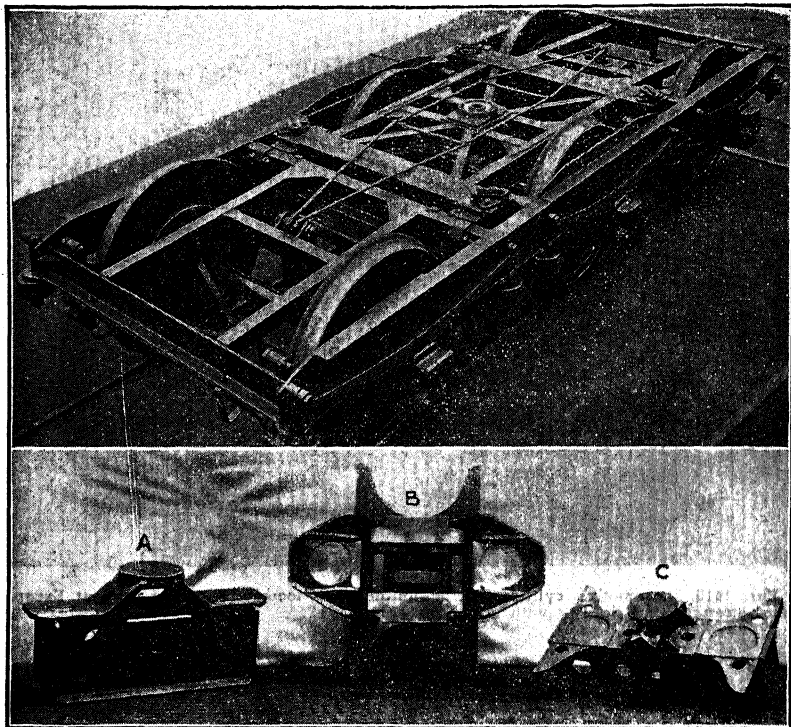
Locomotive parts fabricated in England. Top view shows all-welded six-wheel carriage. Bottom view shows boggie center frame stretcher and pony truck center frame stretcher. These parts were fabricated by welding at a saving of 30 per cent over riveting.
